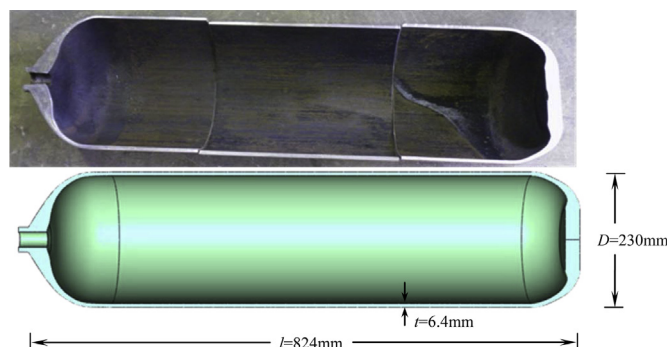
Cross-sectional view and 3D model of a 30-L CNG cylinder.
